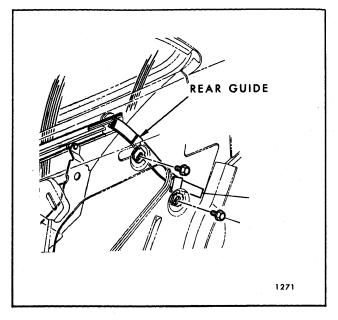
Rear Quarter Window Rear Guide Assembly - "Z-37" Styles
